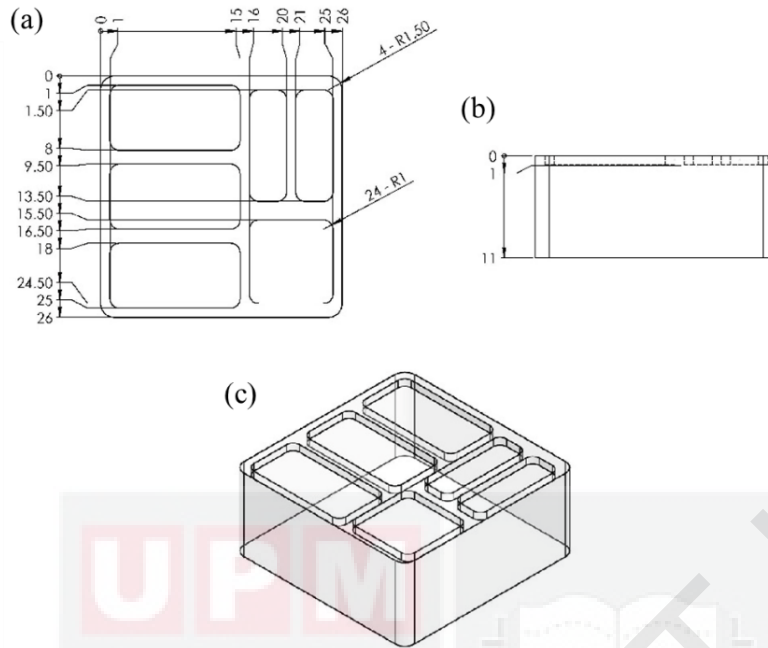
Dosimeter holder (D2) design: (a) Top view, (b) side view, (c) orthographic view
